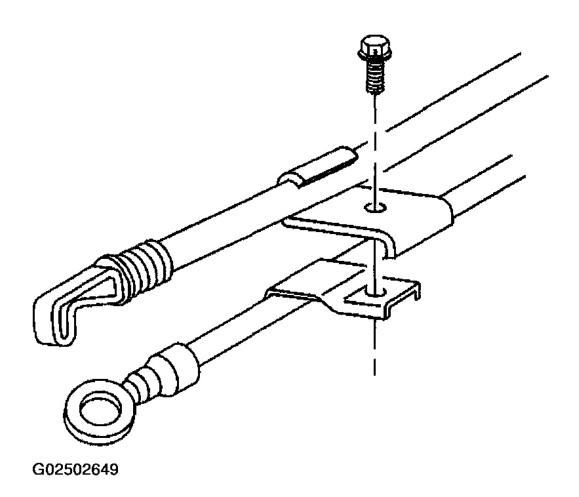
Installing Oil Level Indicator Tube-To-Transmission Fluid Fill Tube Bolt Courtesy of GENERAL MOTORS CORP.
